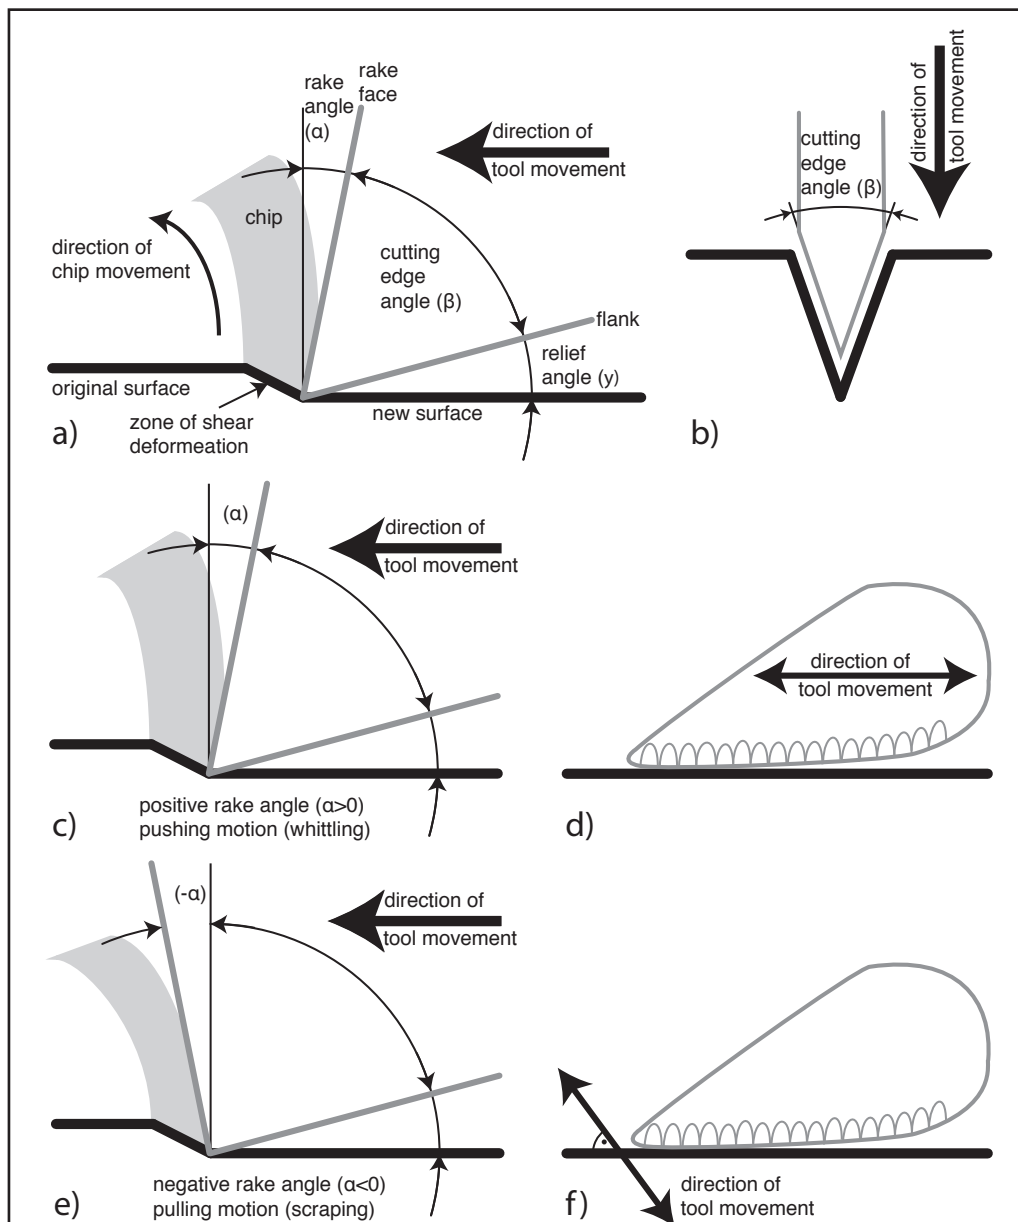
Cutting-edge geometry. a) Terminology adopted from modern industrial machining for cutting-off (see e.g., Oberg et al. 2012); b) Illustration of cutting-in (see also Soressi 2002, fig. III 8); c) Cutting-off with positive rake angle (whittling after Takase 2010); d) Illustration of cutting-in with longitudinal tool movement (use as knife, consider that also a force to the surface is necessary); e) Cutting-off with negative rake angle (scraping after Takase 2010) and f) Illustration of cut-off with longitudinal tool movement (use as scraper or whittler, consider that also a force to the surface is necessary).
